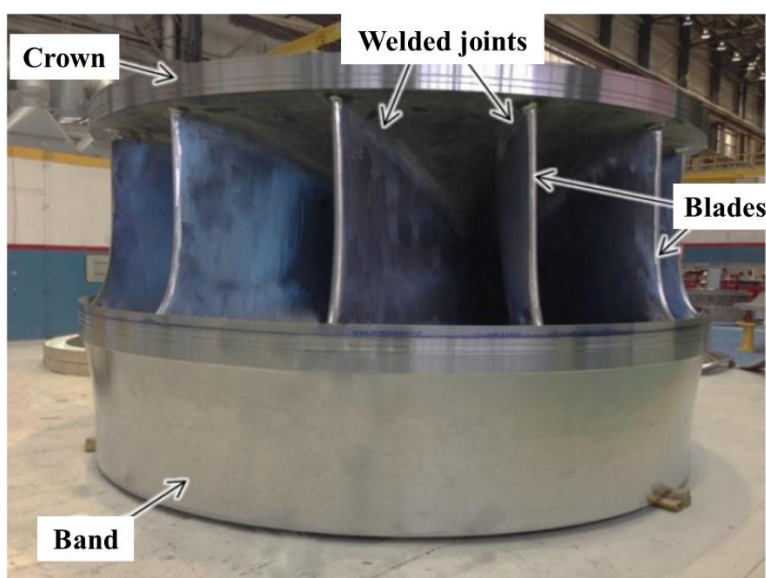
Francis hydroelectric turbine runner consisting of blades welded to the crown and the band [2].
